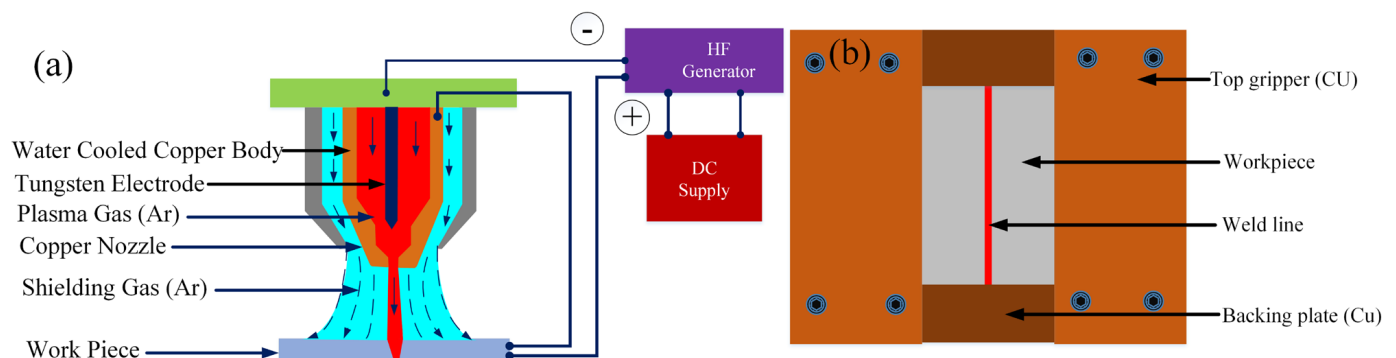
Schematic of (a) MPAW nozzle (b) copper fixture
